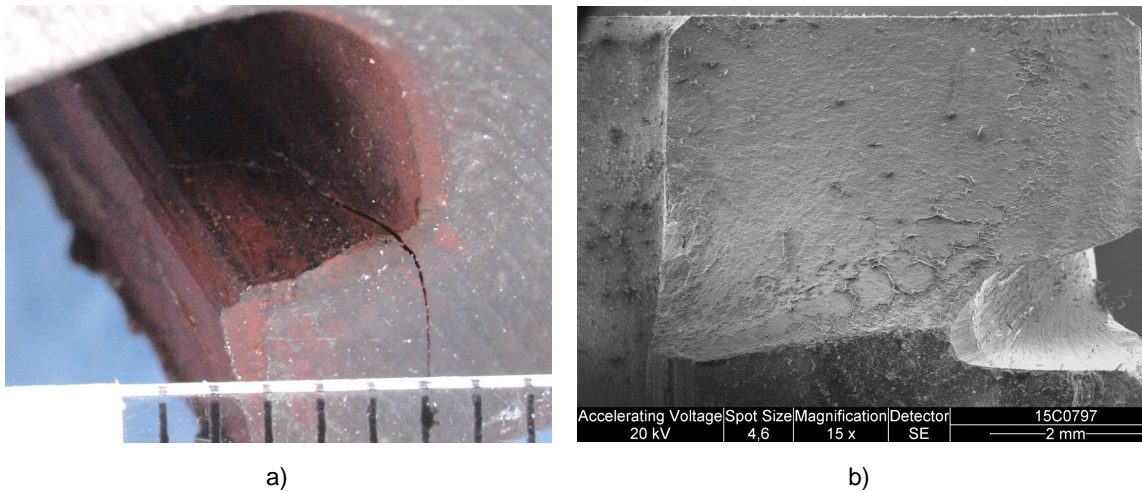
a) Crack in blade 108 and b) opened fracture surface (grinding on the right for opening)
